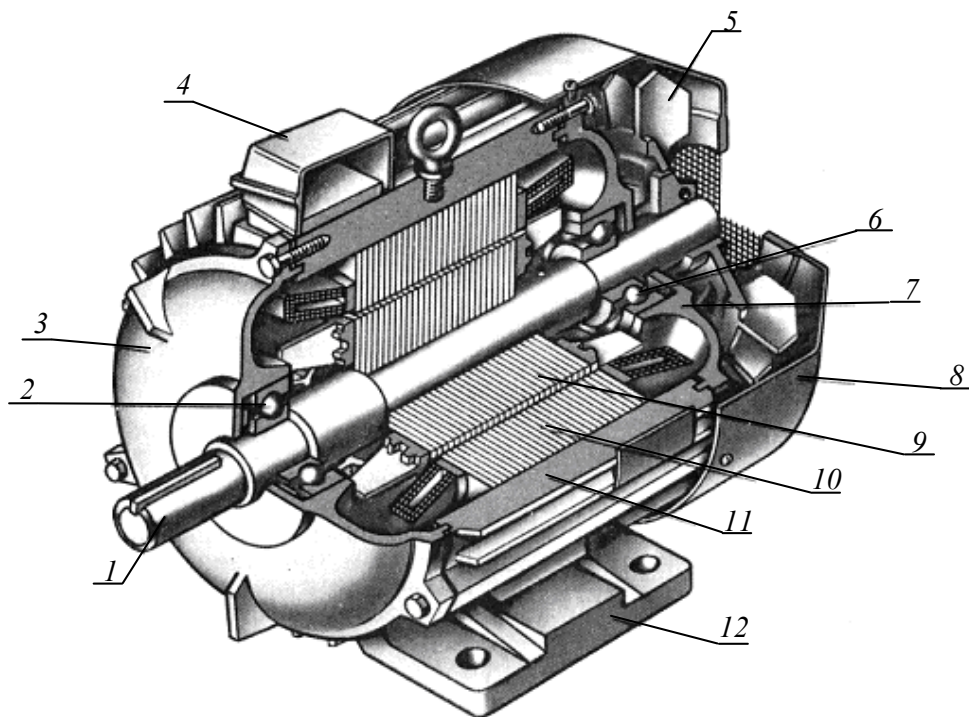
A three-phase cage induction motor: 1- shaft, 2 and 6 –bearings, 3 and 7 – end shields, 4 – terminal box, 5 – fan, 8 – fan cover, 9 – rotor core with cage winding, 10 – stator core with winding, 11 – frame, 12 –feet
